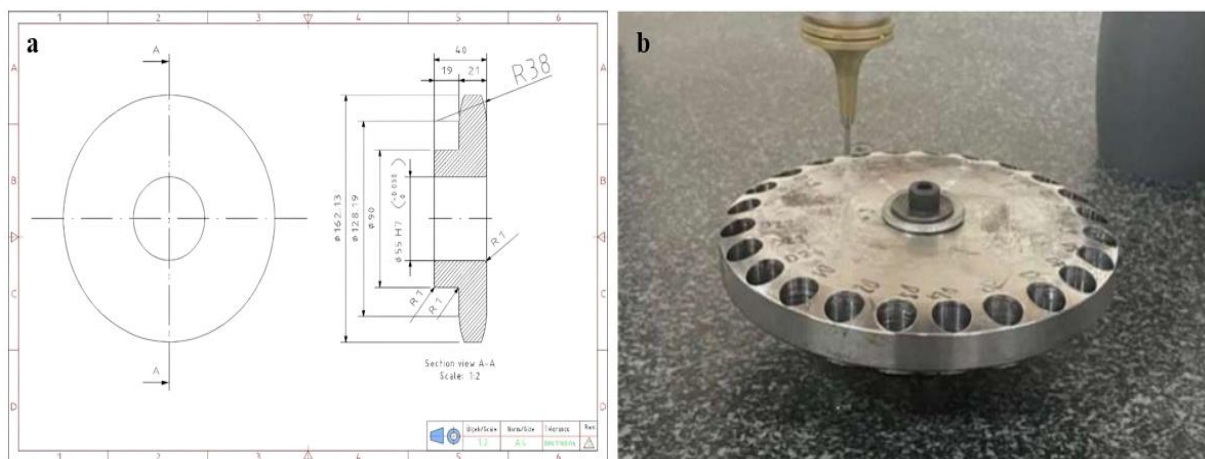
16B chain sprocket technical drawing (a) and Test specimen (b)
